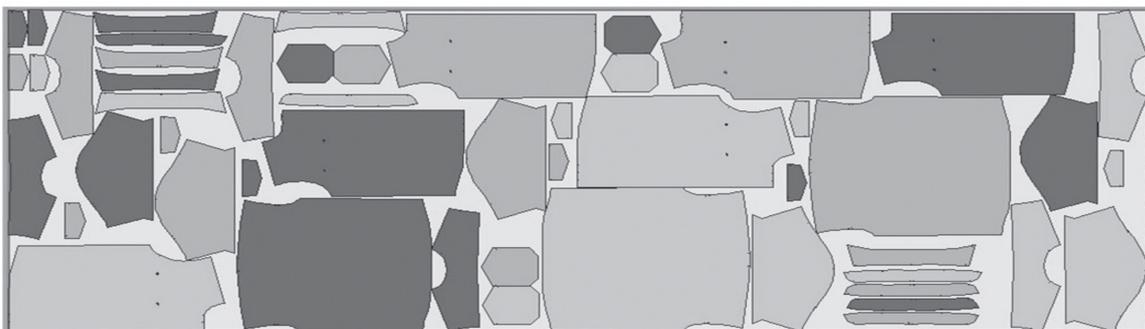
Pattern layout in a conventional design process | adapted from (Armstrong, 2009) |
